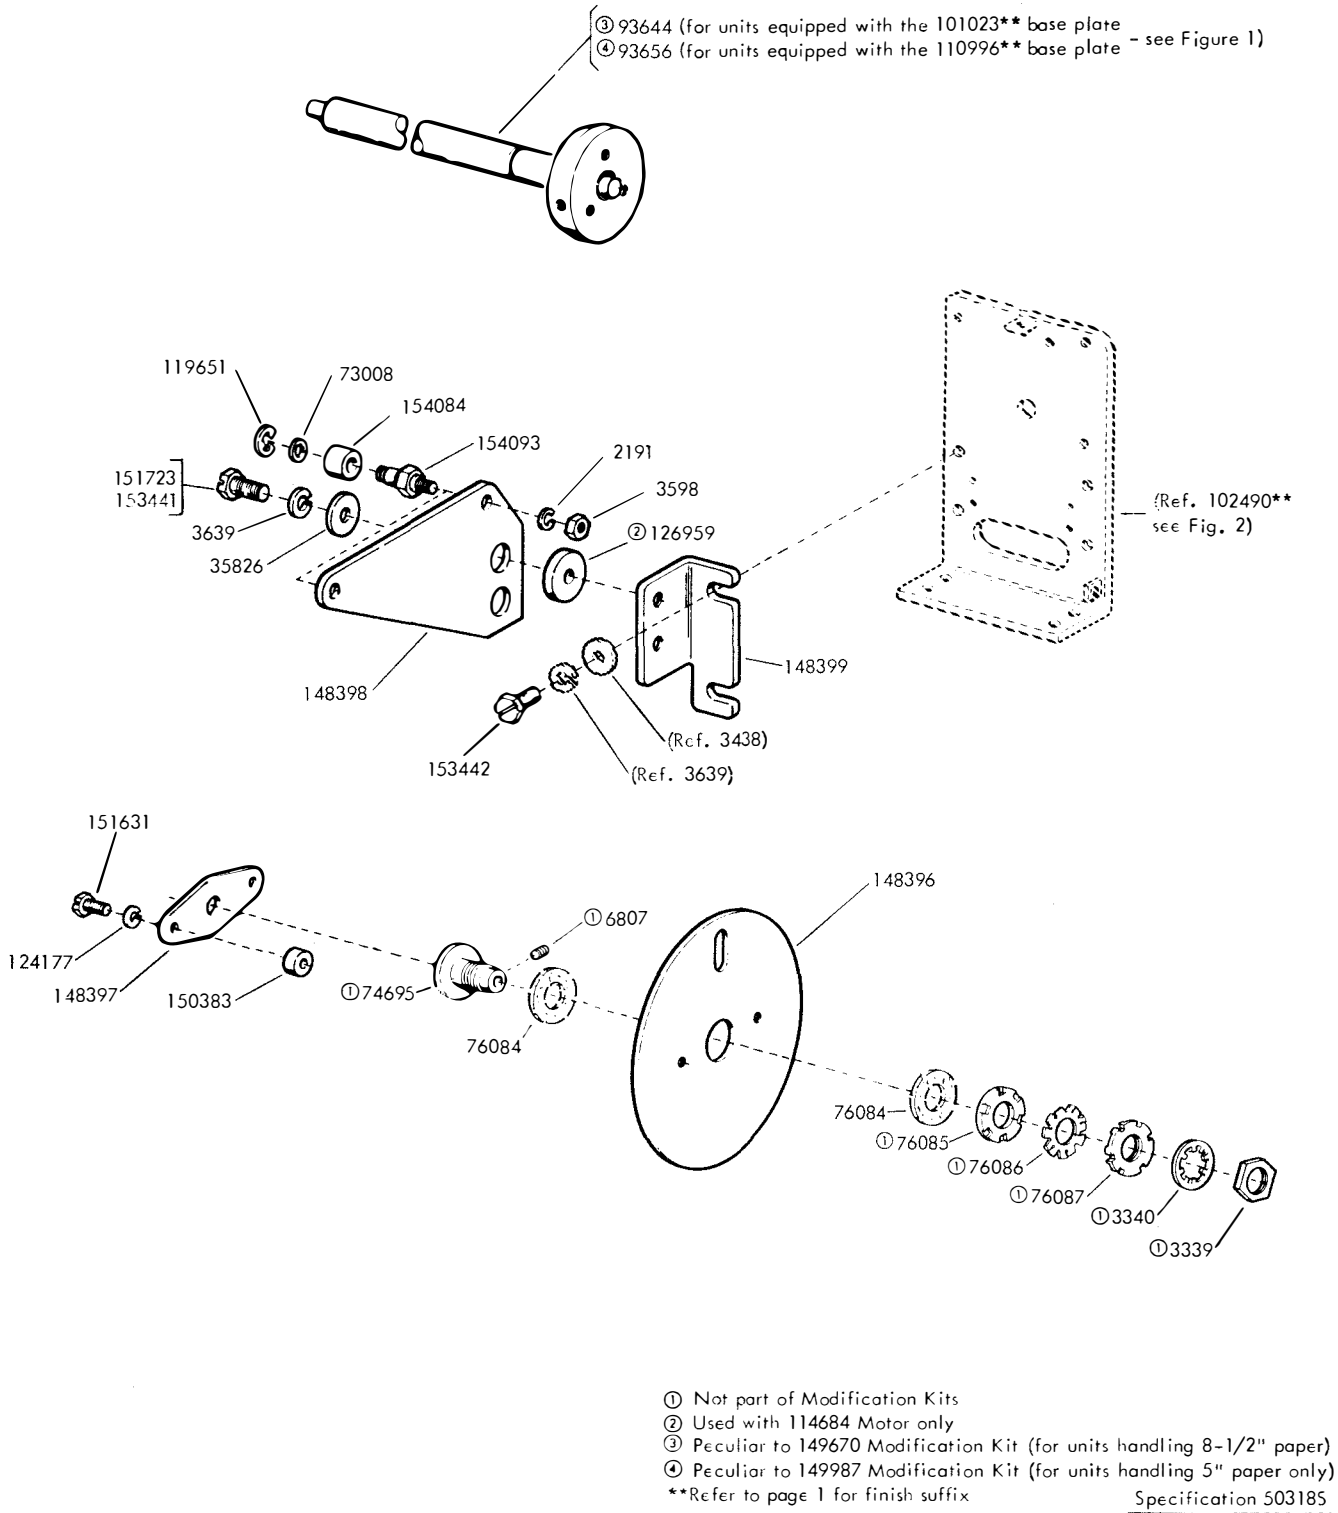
MODIFICATION KITS TO PROVIDE PAPER SPINDLE SHAFT SUPPORT BRACKETS AND BEARINGS
